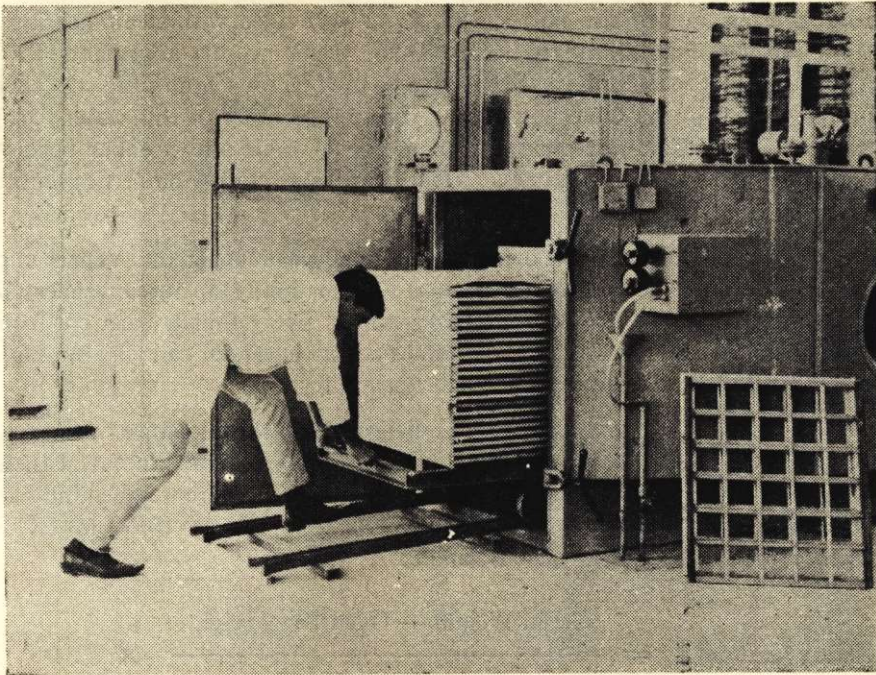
Driving the trolley loaded with wet veneers into dry kiln.
